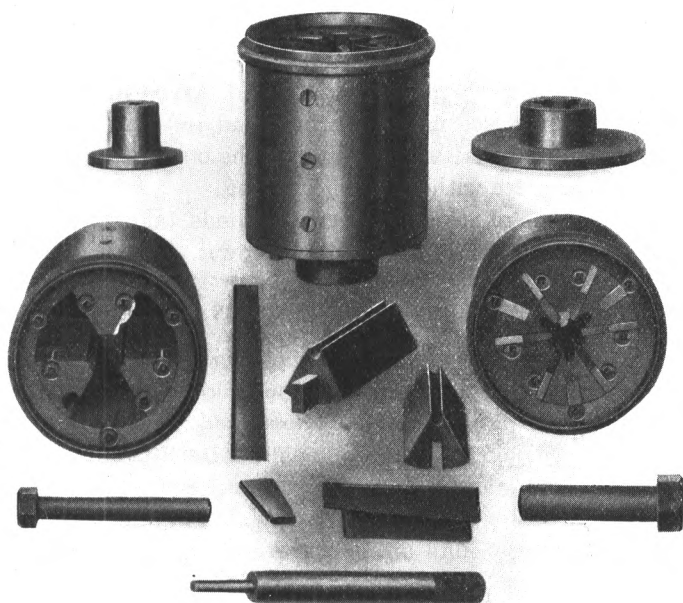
CUTTER HEAD AND ATTACHMENTS
